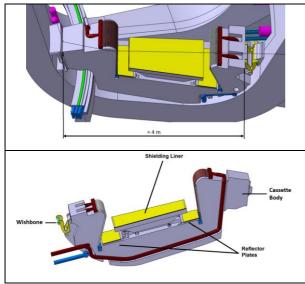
CAD model of 2019 DEMO divertor assembly.
